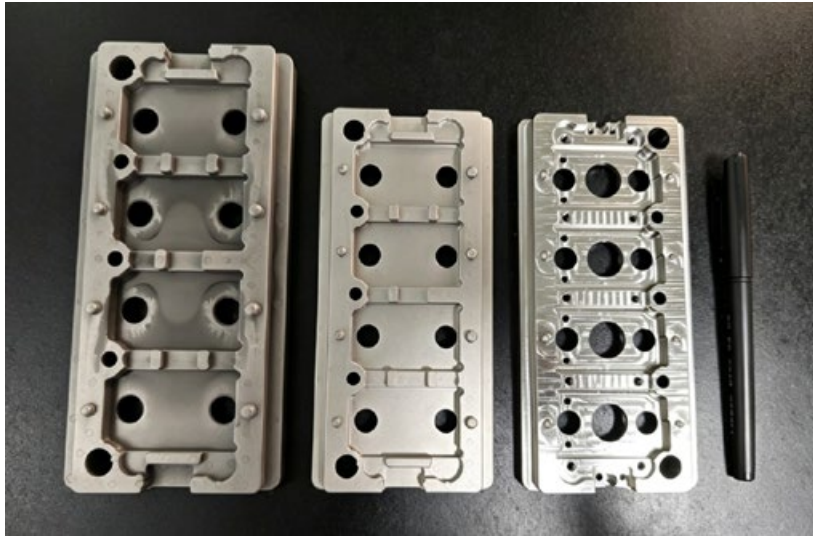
A large 17-4PH stainless steel MIM component at different stages of processing (left to right), from as-moulded condition to sintered and CNC-machined. A 980 g injection shot (including runner and feedstock) yields a ~790 g green part, which reduces to ~720 g after debinding and sintering, before final machining to ~590 g (Courtesy Kunshan DanFu Precision Technology, China)
